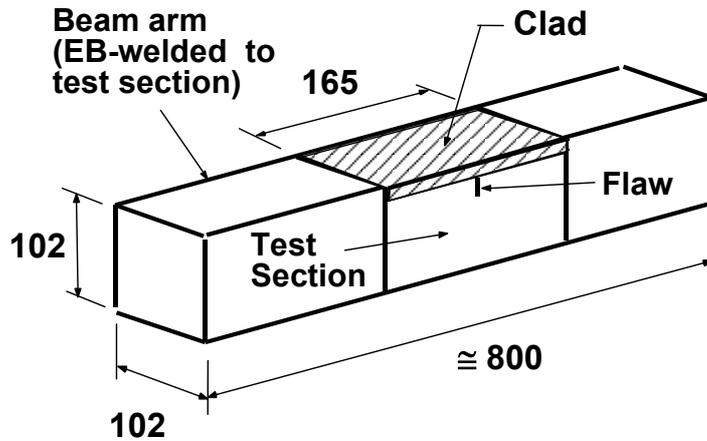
Design of the embedded flaw test piece (dimensions in mm).
